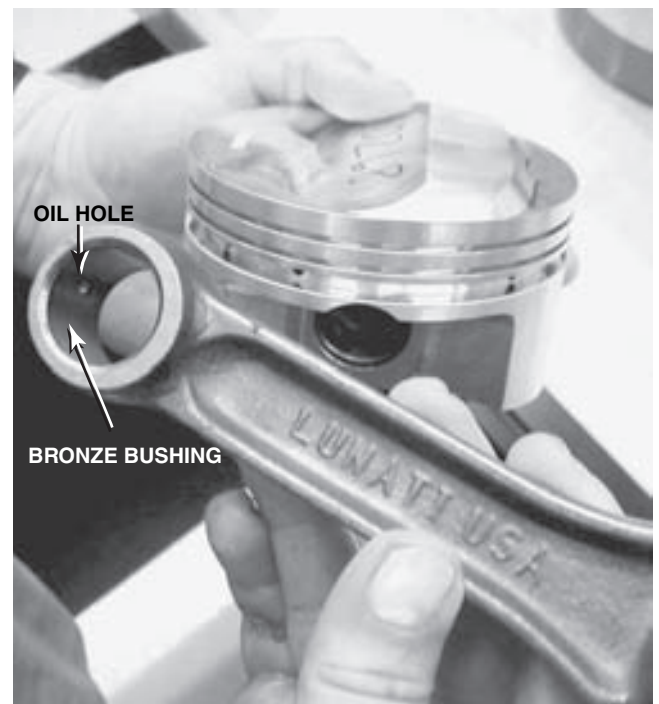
This high-performance connecting rod uses a bronze bushing in the small end of the rod and oil hole to allow oil to reach the full-floating piston pin.
